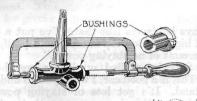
(above). Hack-saw through side wall of your spindle body bushings and they can be driven out easily
